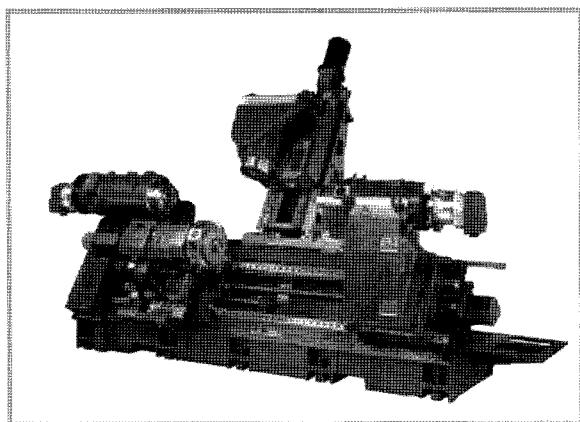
Multi-Path Multi-Tasking Machine Tools
